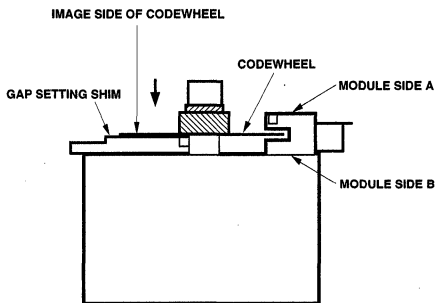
Alignment Tool is Used to Set Height of Codewheel.
